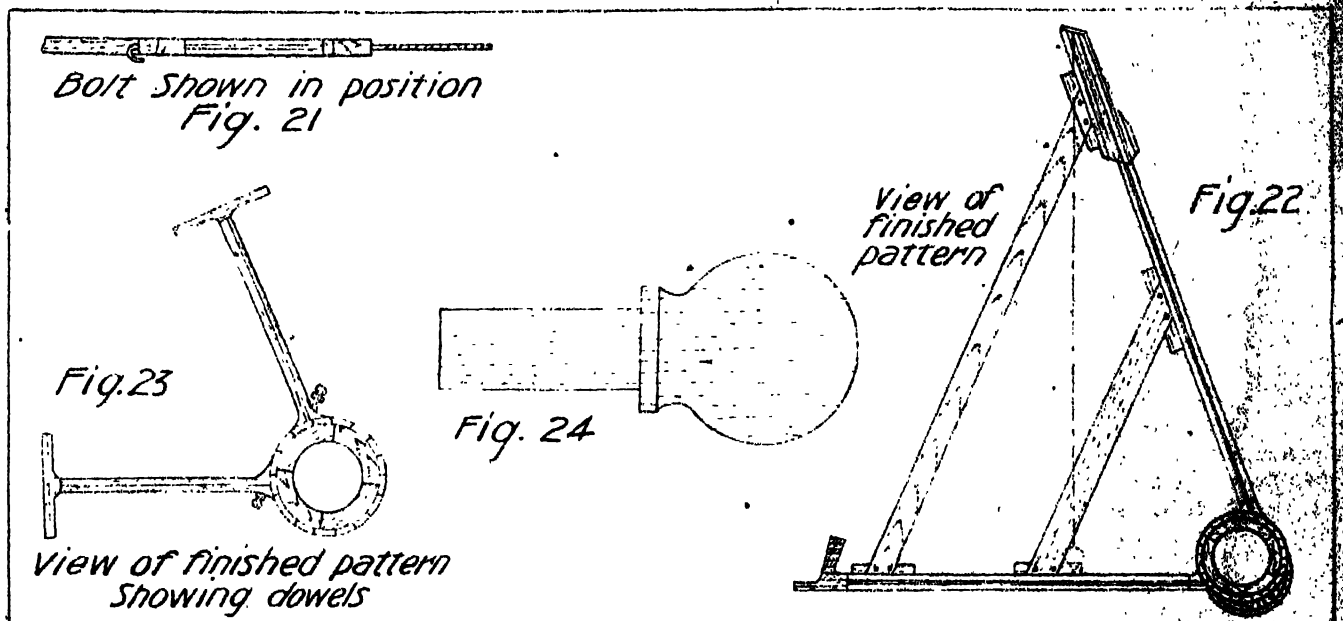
HOOK BOLT SET IN POSITION FIG. 22—PROPELLER BRACKET PATTERN COMPLETED AND ASSEMBLED FIG. 23—COMPLETED PATTERN SHOWING THE USE OF DOWELS FIG. 24—DETAIL OF SUITABLE FORM OF DOWEL
